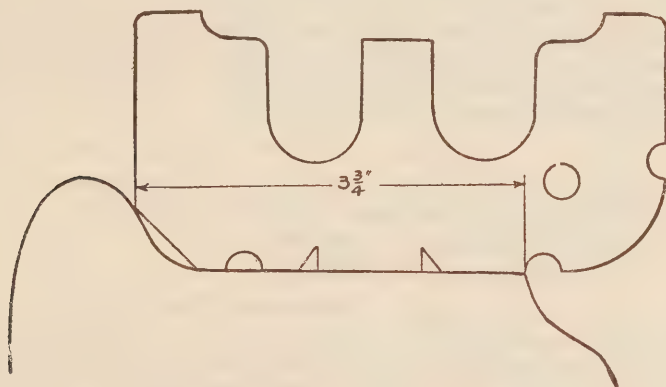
METHOD OF GAUGING BROKEN RIMS
